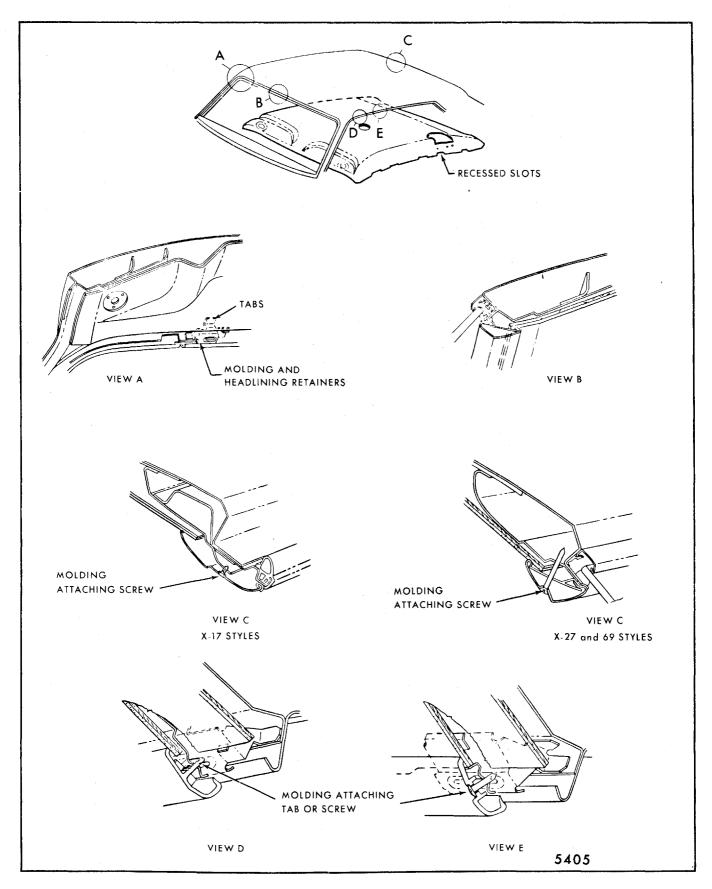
One Piece Formed Headlining - F, H and X Styles
